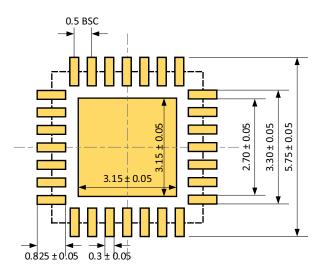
Recommended board layout for QFN 28-pin 5x5mm (all dimension in mm)
